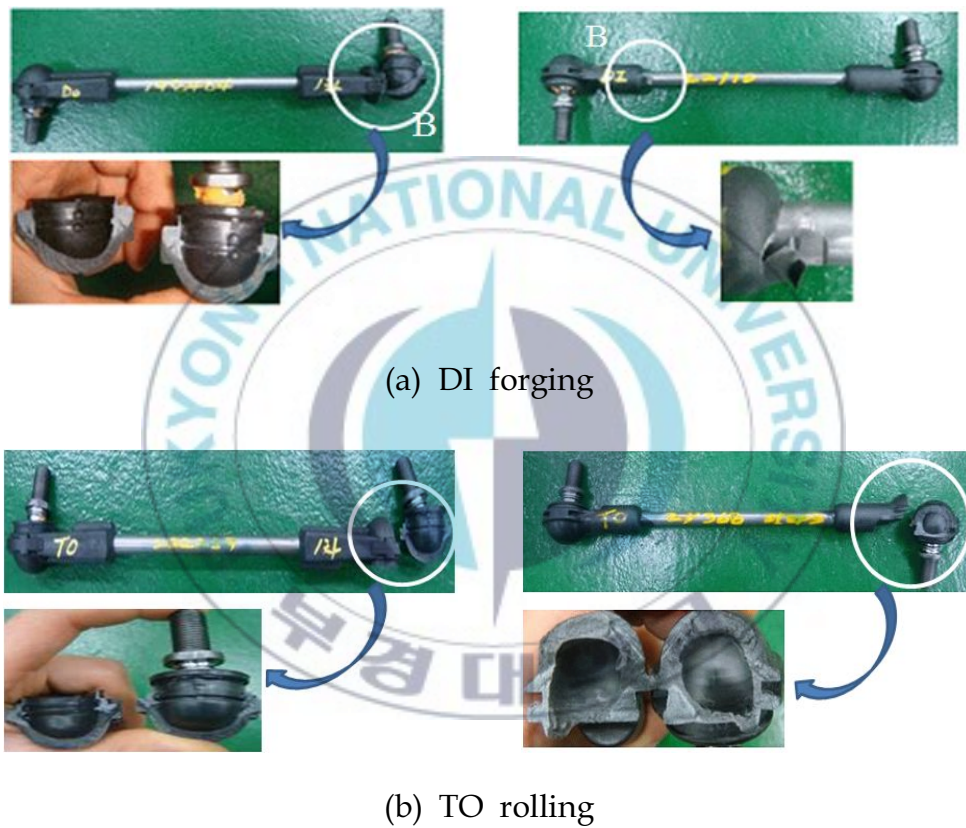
Typical example of pull out of rod end and damage of ball joint
